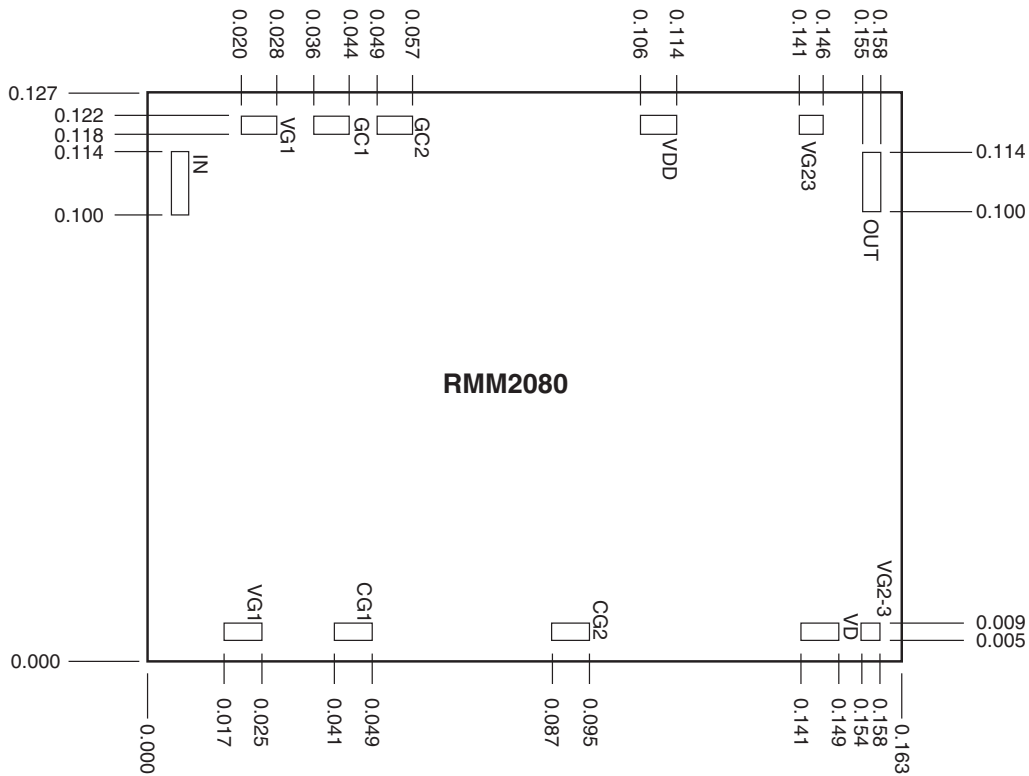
Location and Size of Bonding Pads (Dimensions in Inches)
